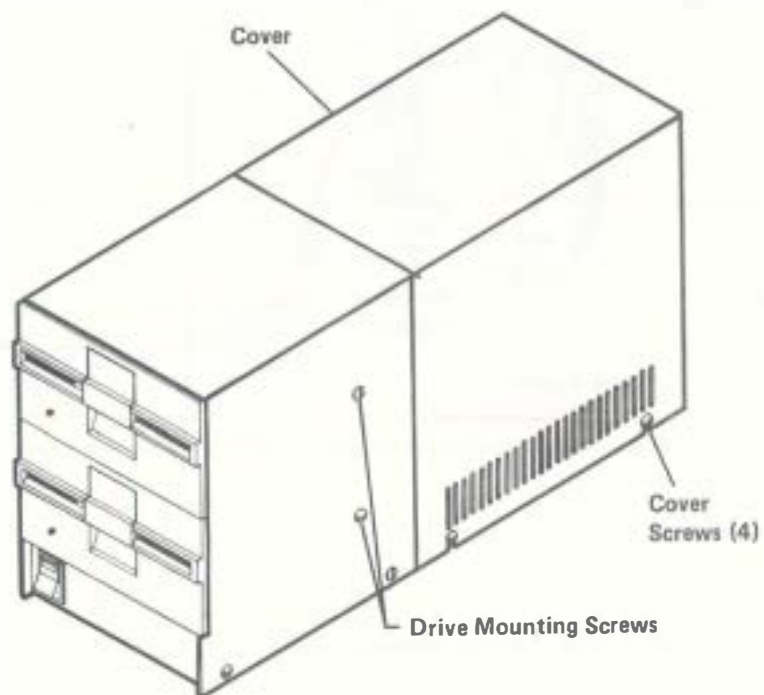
5 $\frac{1}{4}$ " Diskette Drive Assembly
